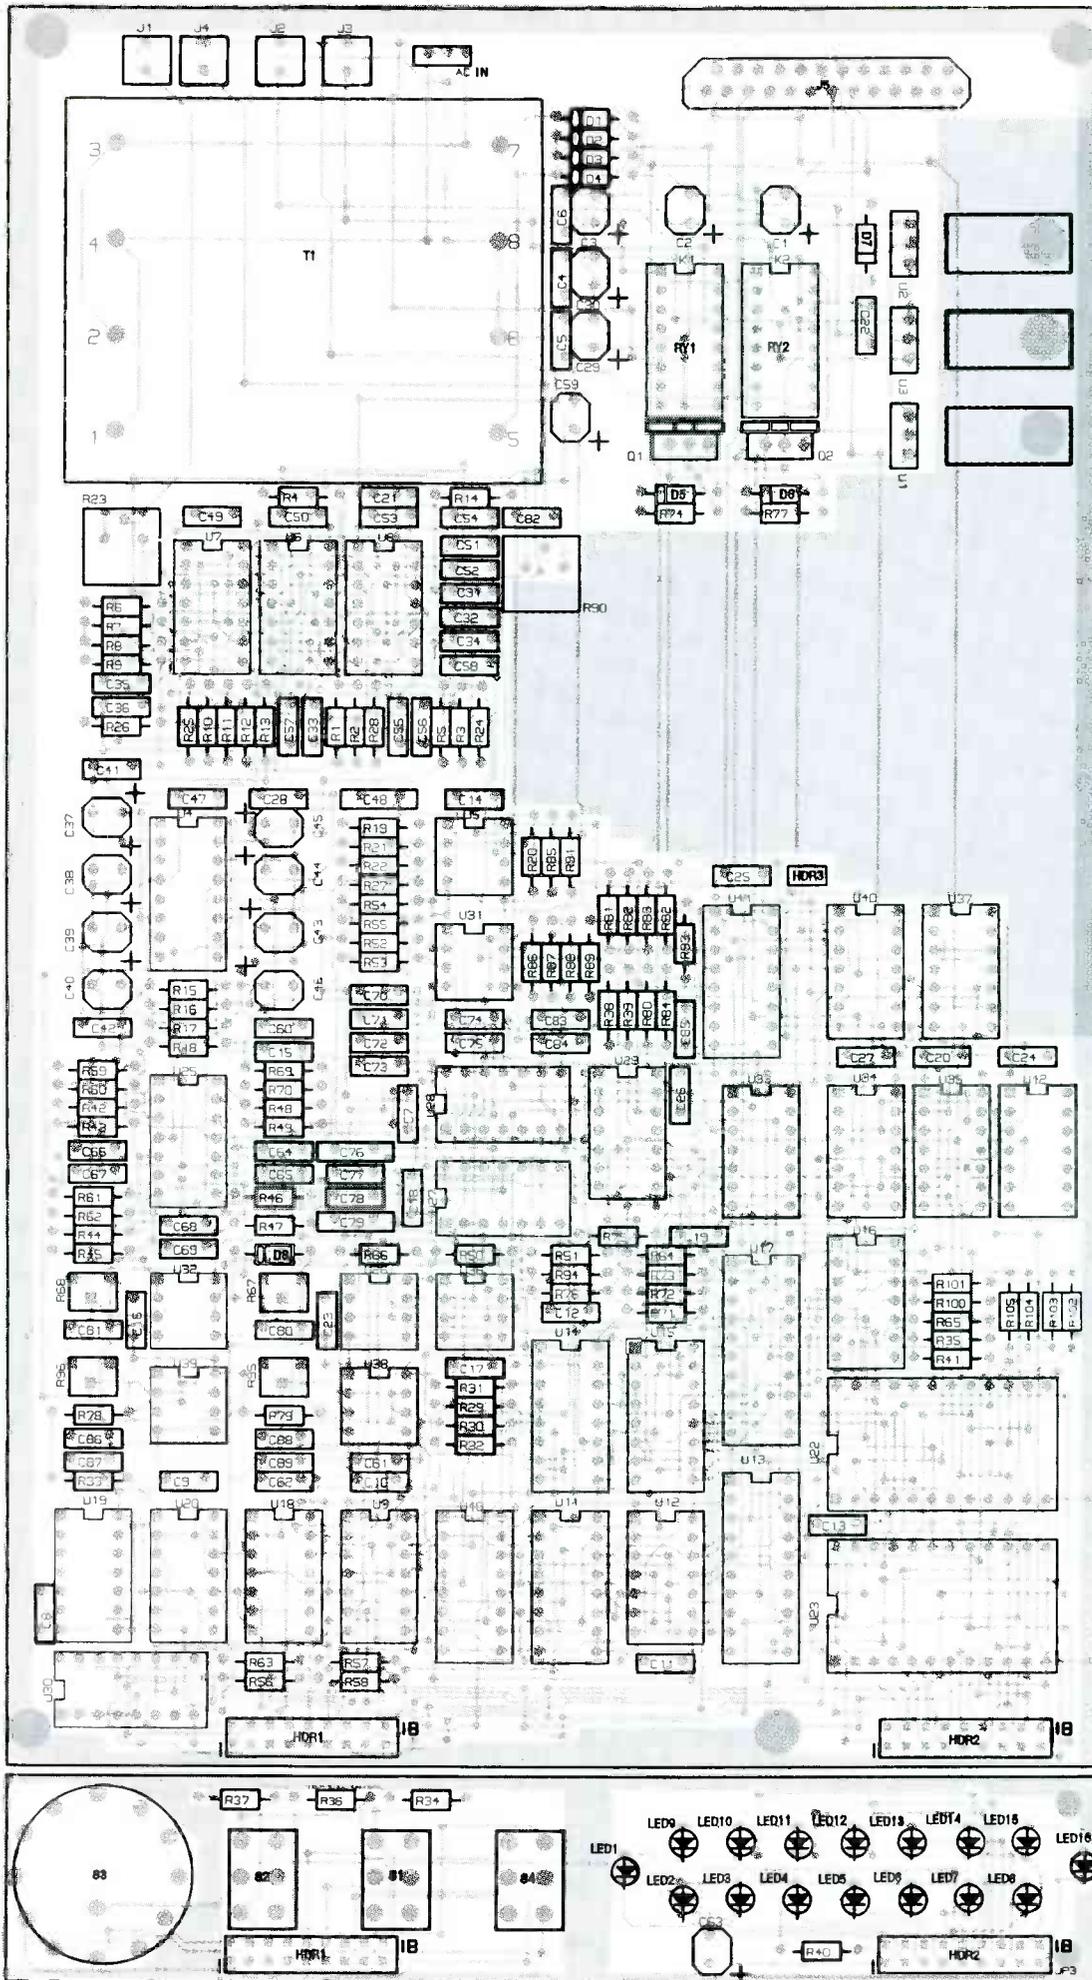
PARTS-PLACEMENT DIAGRAMS for the main board and the display board. The main board is very complex, so you probably won't want to make it yourself.
